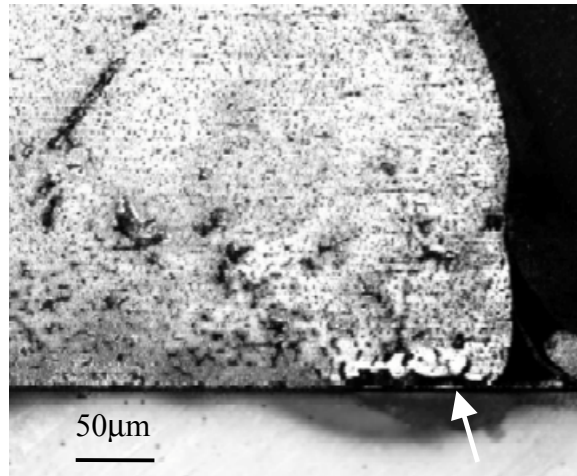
A zoomed-in view of the corner crack shown in Figure 3.38.
